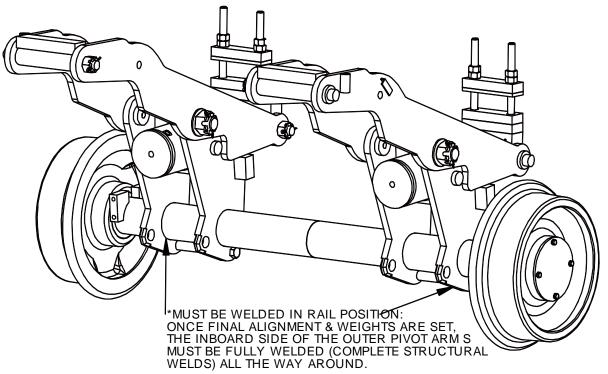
A Standard Railgear Final Weld-out
